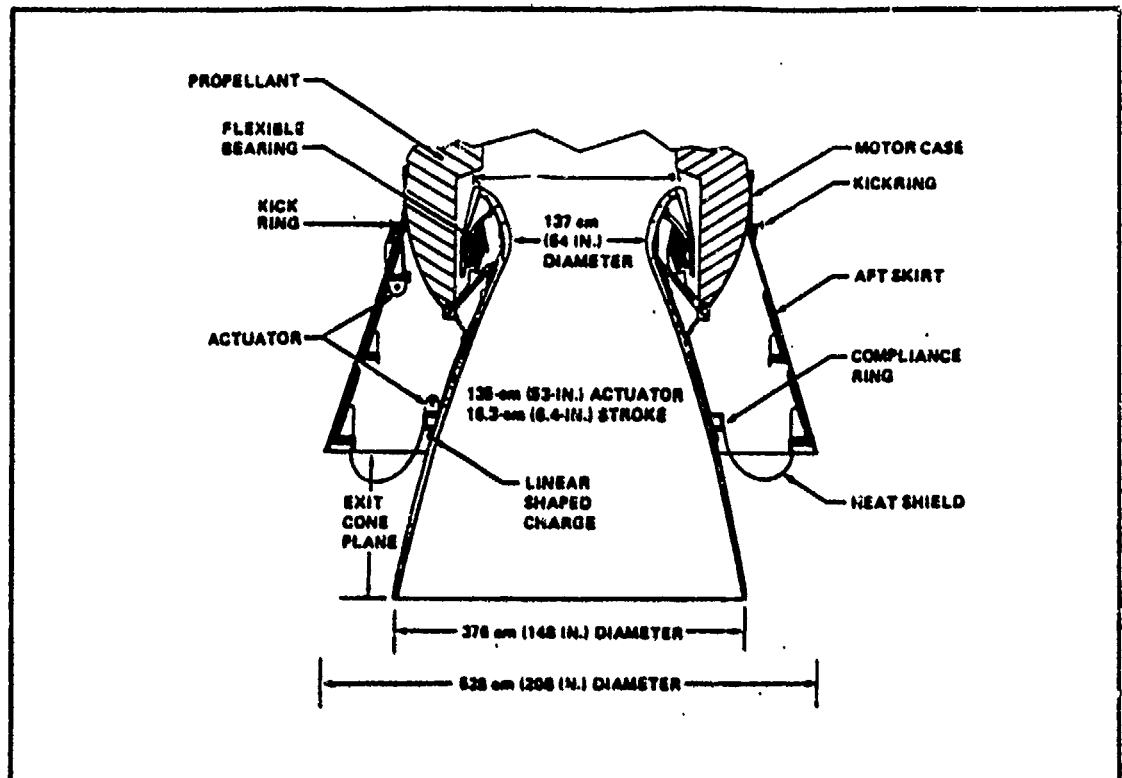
Space Shuttle Nozzle Sketch [Ref. 13]
